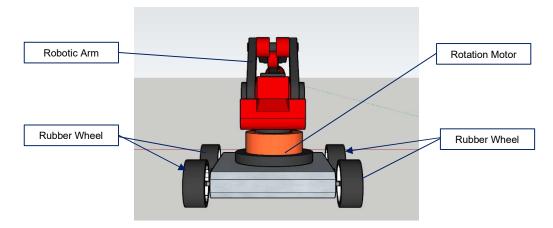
The component in the body part of the Tiles Installer Robot from the rearview
